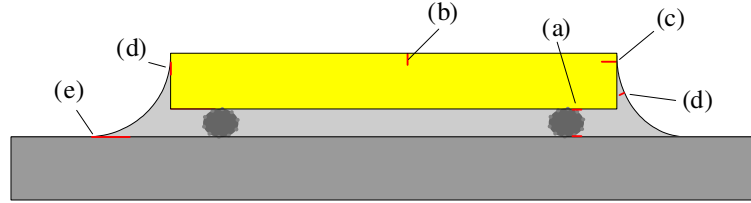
Reported location of failure of solder bumped flip chip interconnections: (a) solder fatigue followed by delamination of passivation and underfill or visversa; (b) horizontal chip cracking [116]; (c) vertical chip cracking [30, 58, 59]; (d) bulk and interfacial cracking in the upper part of the fillet [6, 23, 63, 64]; (e) interfacial cracking between underfill and substrate [5, 27, 46, 64, 70, 71, 73, 108]
